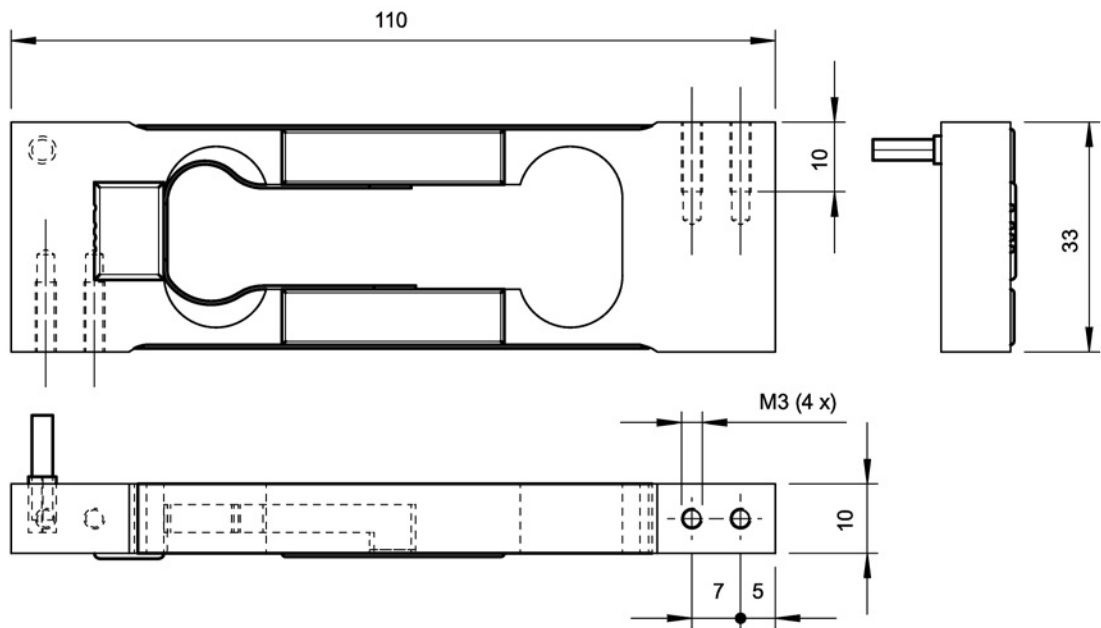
SIWAREX WL260 SP-S AE dimension drawing
